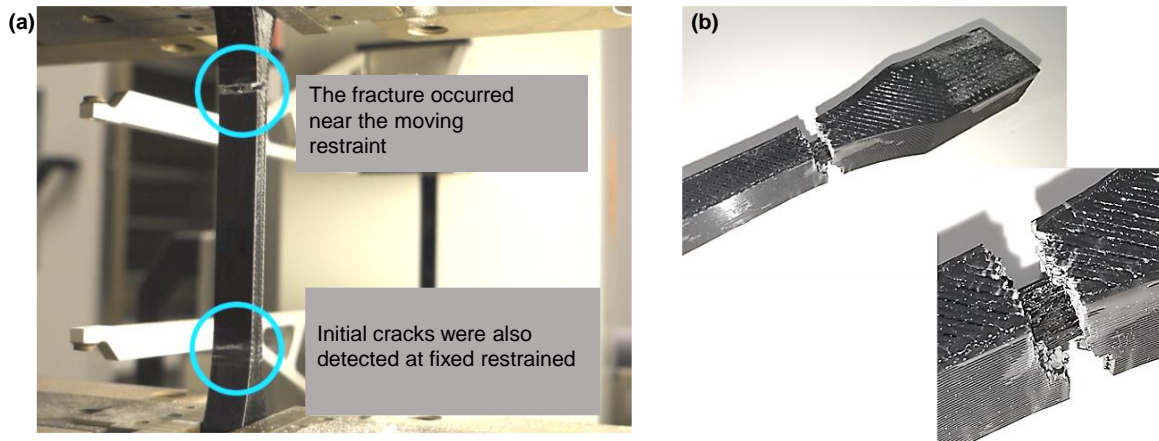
Restraining of specimen on tensile testing machine (a) and typical damage pattern (interface failure) on tensile specimens (b).
